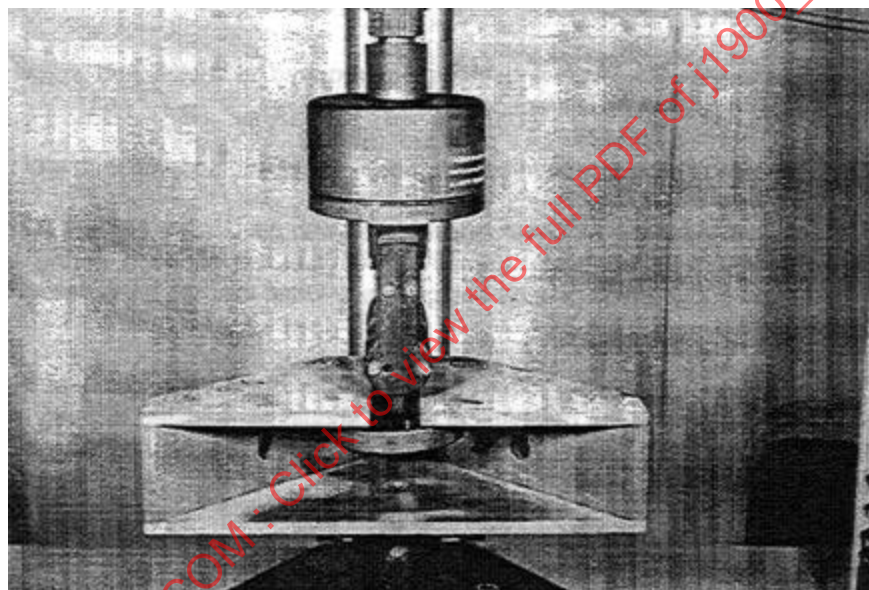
TEST SEAL POSITIONED IN LOWER FIXTURE
